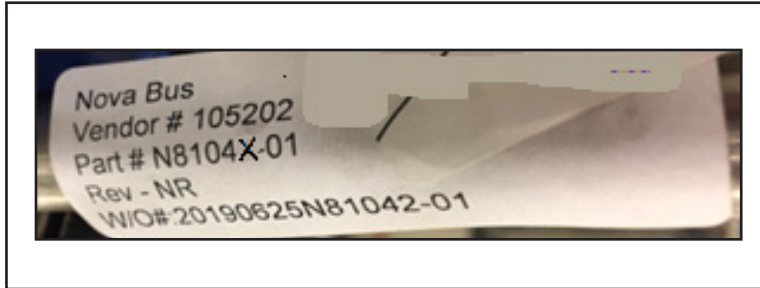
Example of Label - DO NOT REPLACE PIPE
